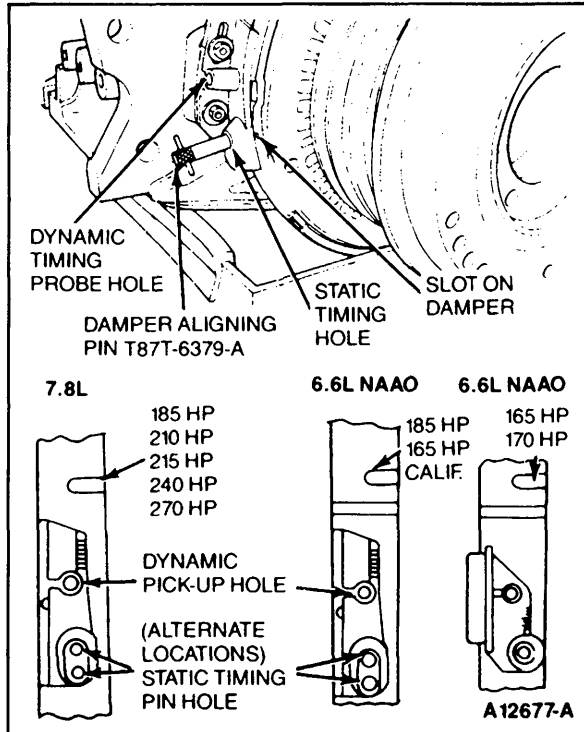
Fitting Timing Pin Into Crankshaft Damper
